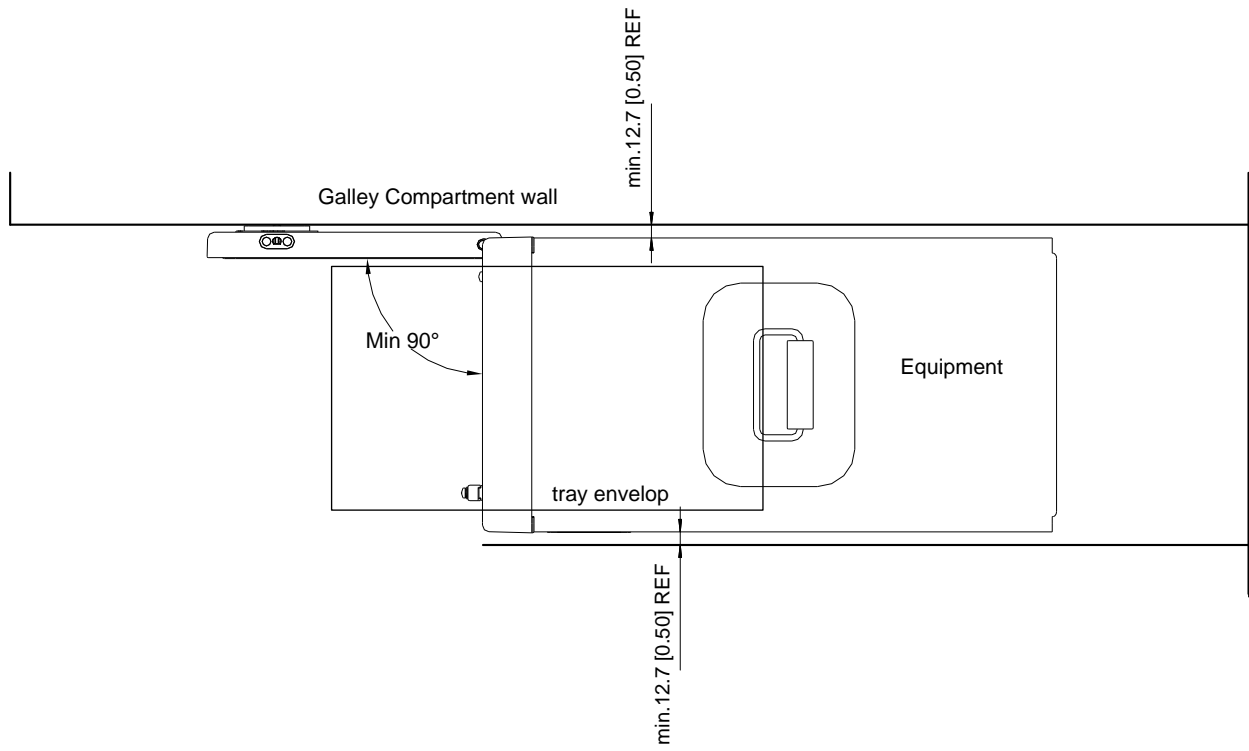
D – Size 4 Top View including Door Opening Envelope
